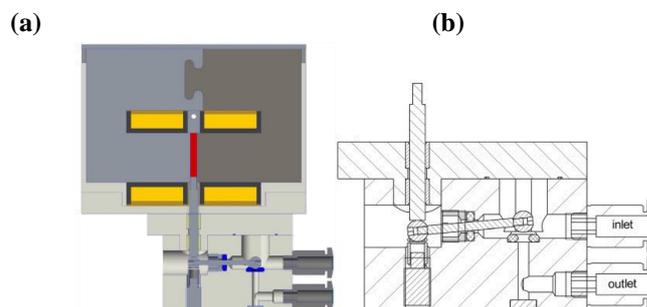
Sectional view of the functional prototype of the valve of the (a) CAD and (b) a drawing of the fluid stage
